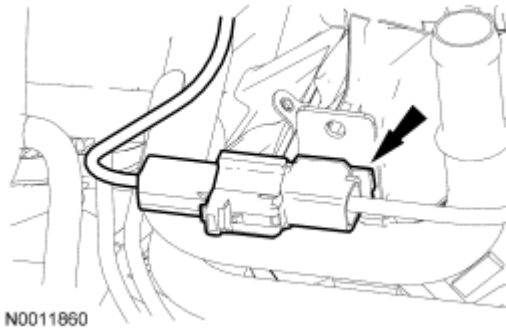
Identifying Cylinder Head Temperature (CHT) Sensor Jumper Harness Electrical Connector
